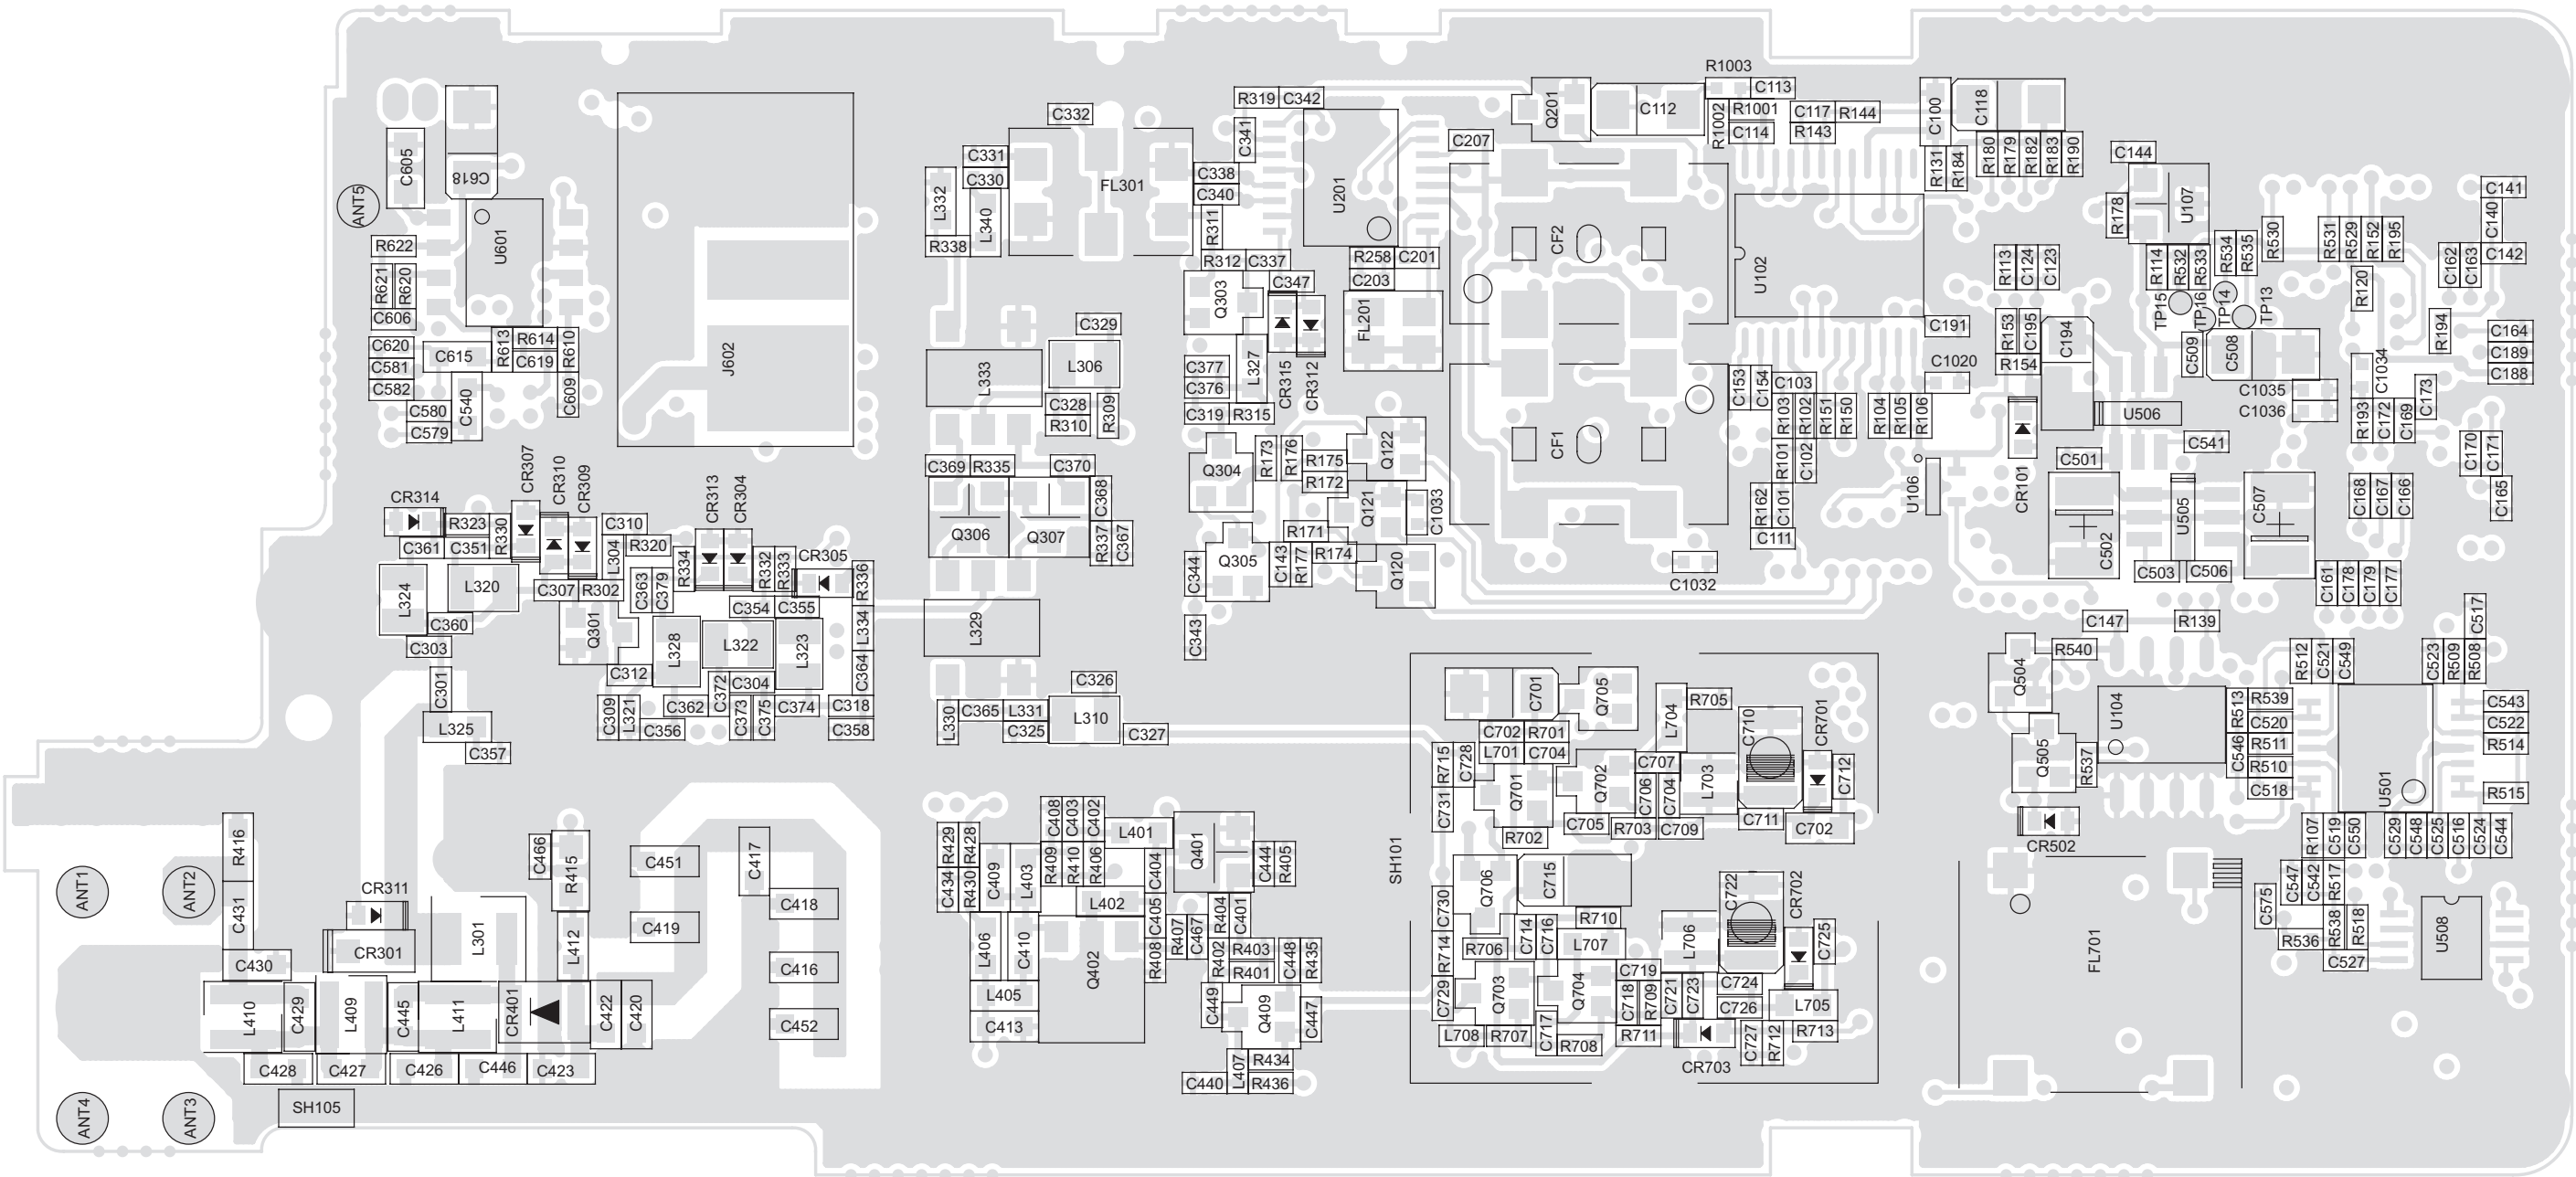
UHF2 (435–480 MHz) Mainboard Bottom Side: PCB No. E11-0767-0
